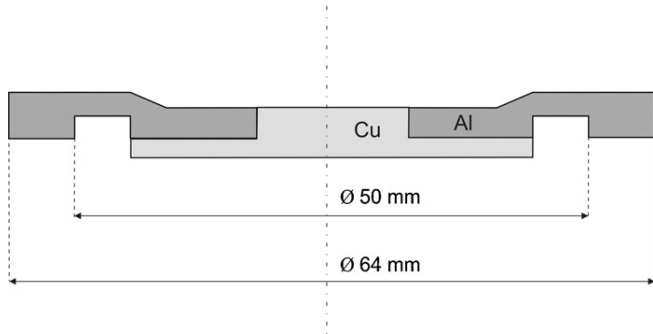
Geometry and dimensions of composed Al/Cu target used in dual magnetron.
